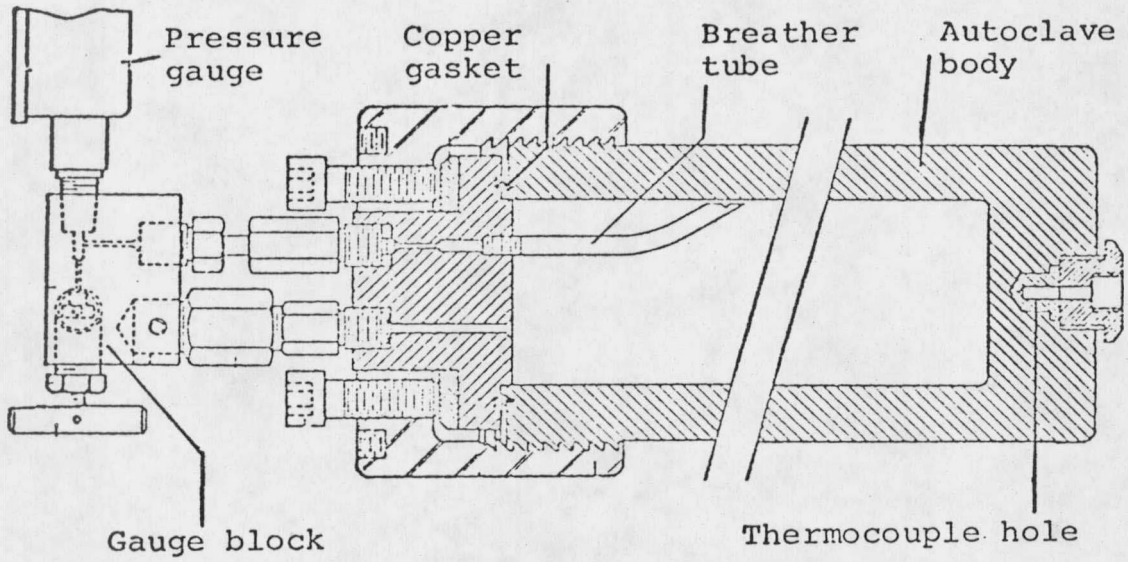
ROCKING AUTOCLAVE ASSEMBLY DETAILS
